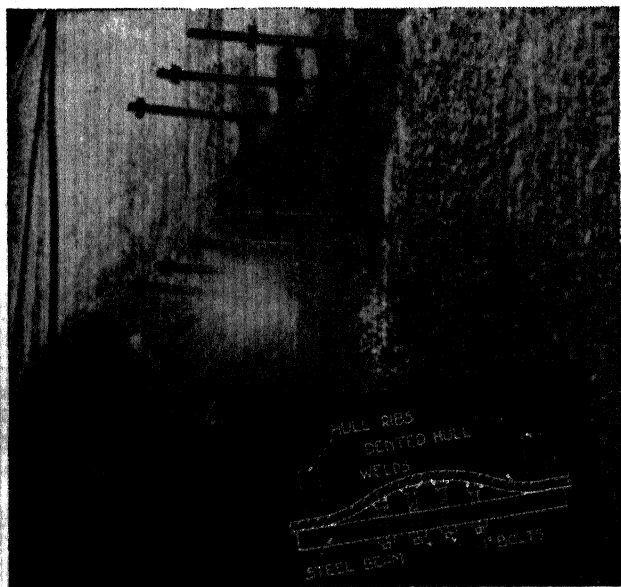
Repairing dent in freighter hull. 12 one-inch bolts (3 rows) were welded to hull and steel beams with holes were slipped over bolts as shown in inset. Dent was then pulled out by tightening nuts. Bolts were cut off with a torch.
